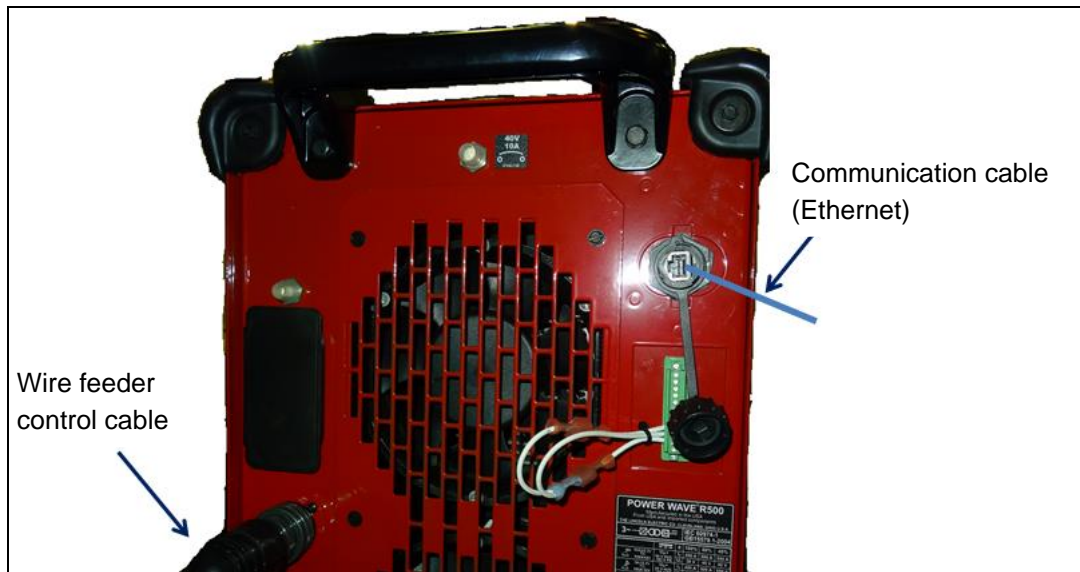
(d) Connection of welding power supply Power Wave R500 (2/2)
